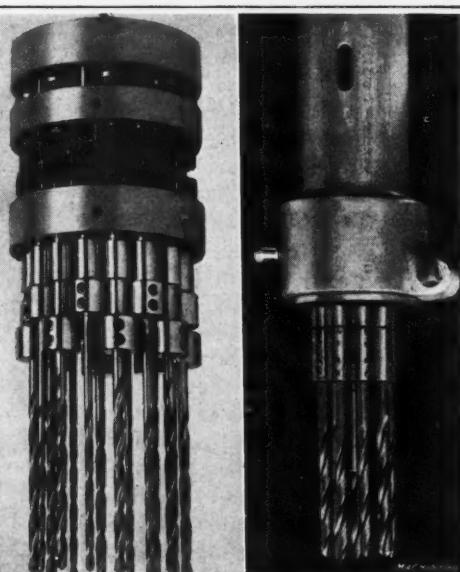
Sixteen-spindle, Fixed-center, Spur-gear Drive
